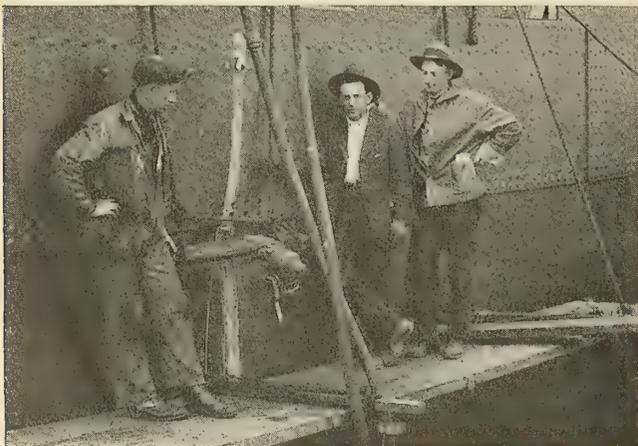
Bolting-Up Jack Removing Dent from Ship Plate
